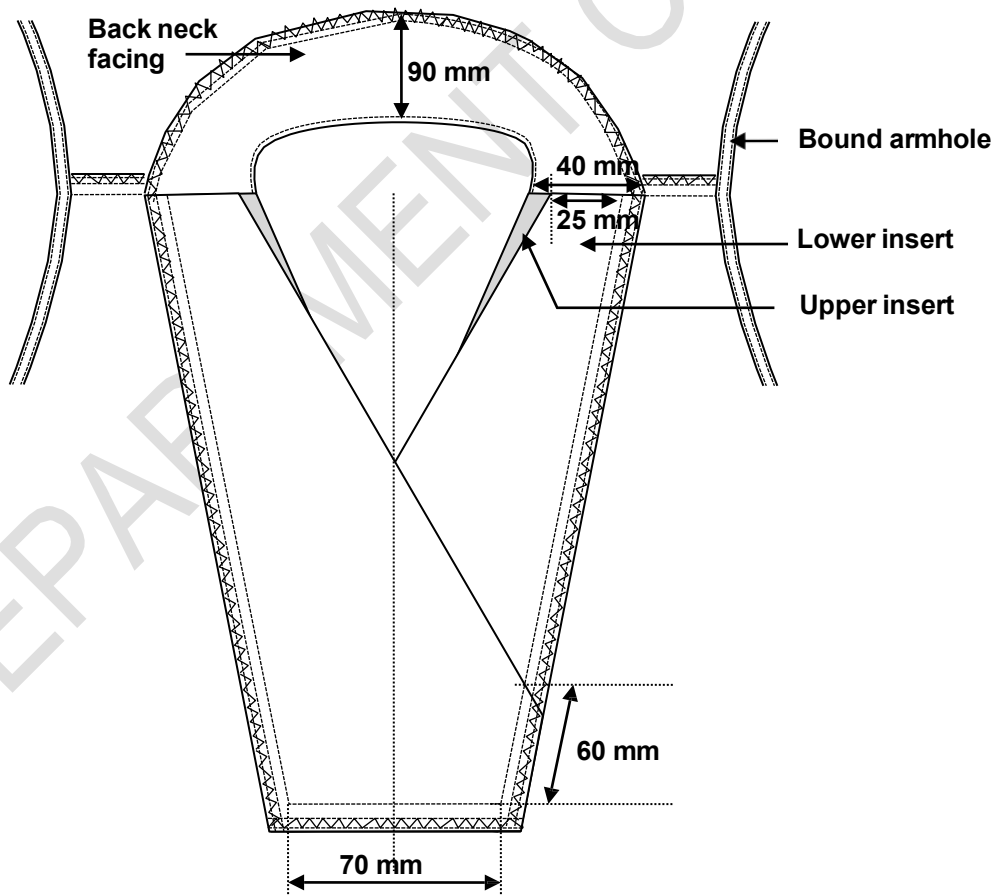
Inside view of neck opening with finished dimensions of the lower inserts and back neck facing
